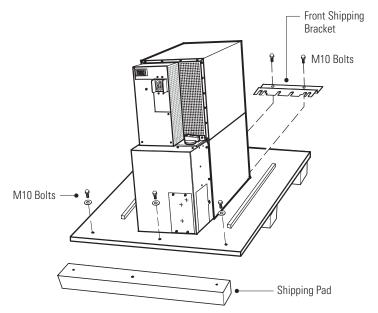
Removing the Front Shipping Bracket and Shipping Pad
